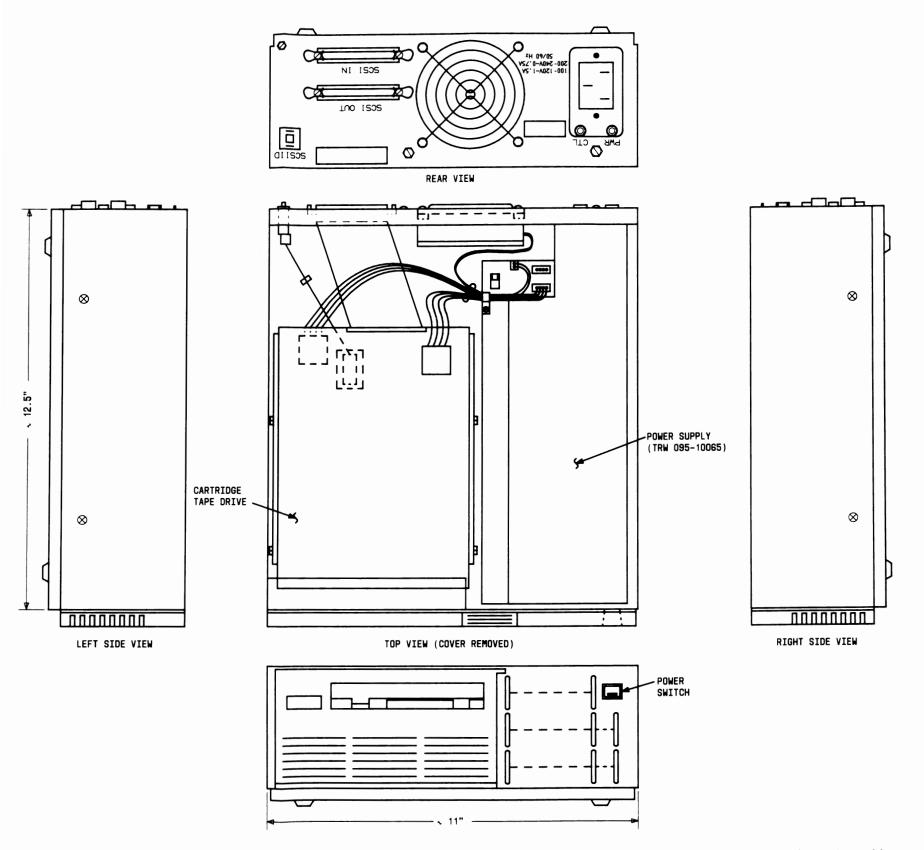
AT&T SCSI TM Cabinet Assembly Drawing (ED-3T011-30, G4, G7)
